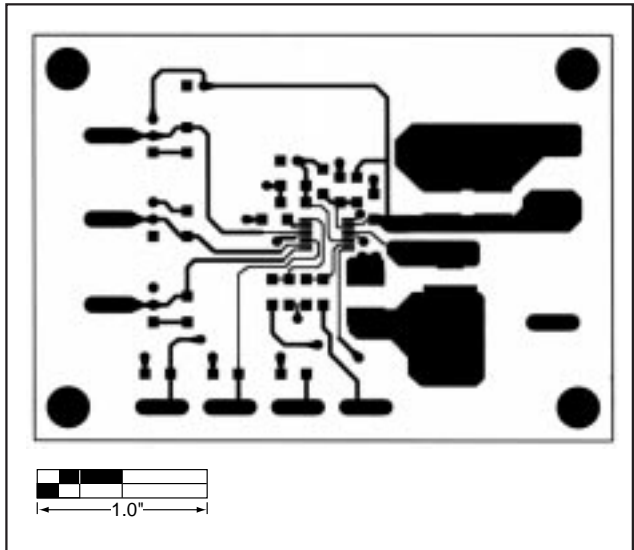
MAX1701 EV Kit PC Board Layout—Component Side
